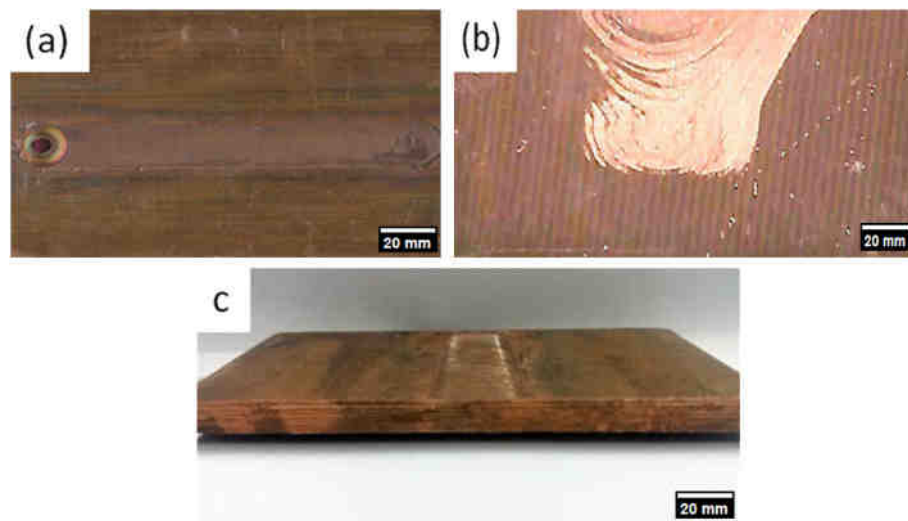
(a) Top view of the processed plate (b) Cross-sectional macrostructure and (c) Cross-section of the processed plate.
